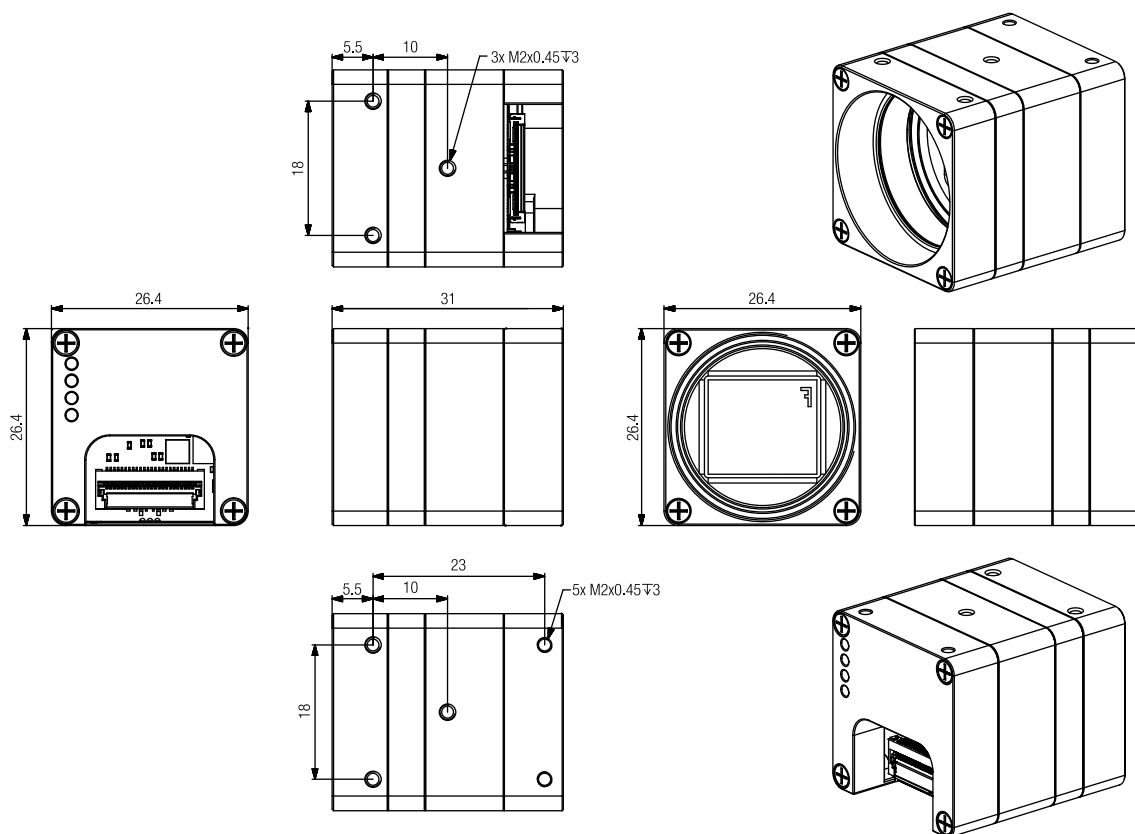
Dimensional drawing of MX081/161/203/245xG-SY-X2G2-FL-HDR (C-mount (with C-mount module B))
